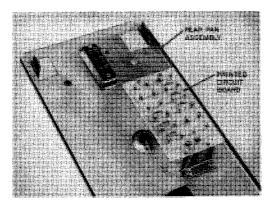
Printed Circuit Board (Part of D-180941 Kit of Parts) Mounted to Rear Pan Assembly of 10A Coinless Telephone Set
